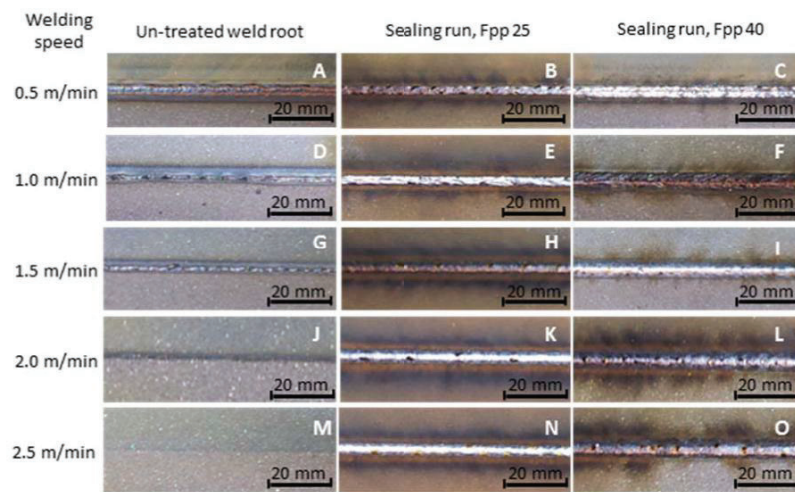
The weld root appearances before the sealing run welding and after the sealing runs made with 25 mm and 40 mm focal distances.
